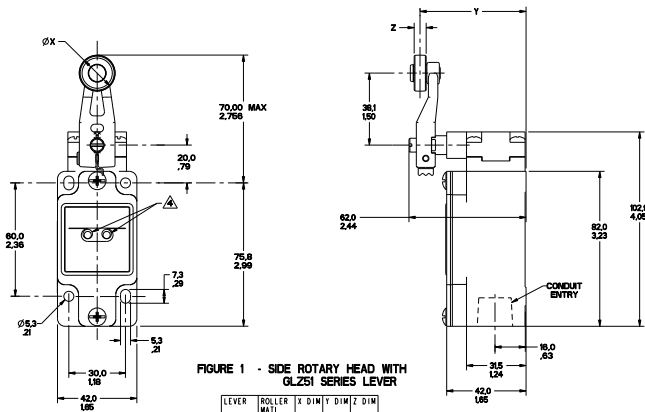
SIDE ROTARY HEAD WITH GL251 SERIES LEVER
